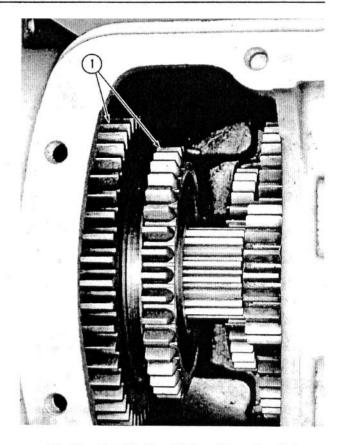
Main Shaft and 2-Gear Cluster Installed
